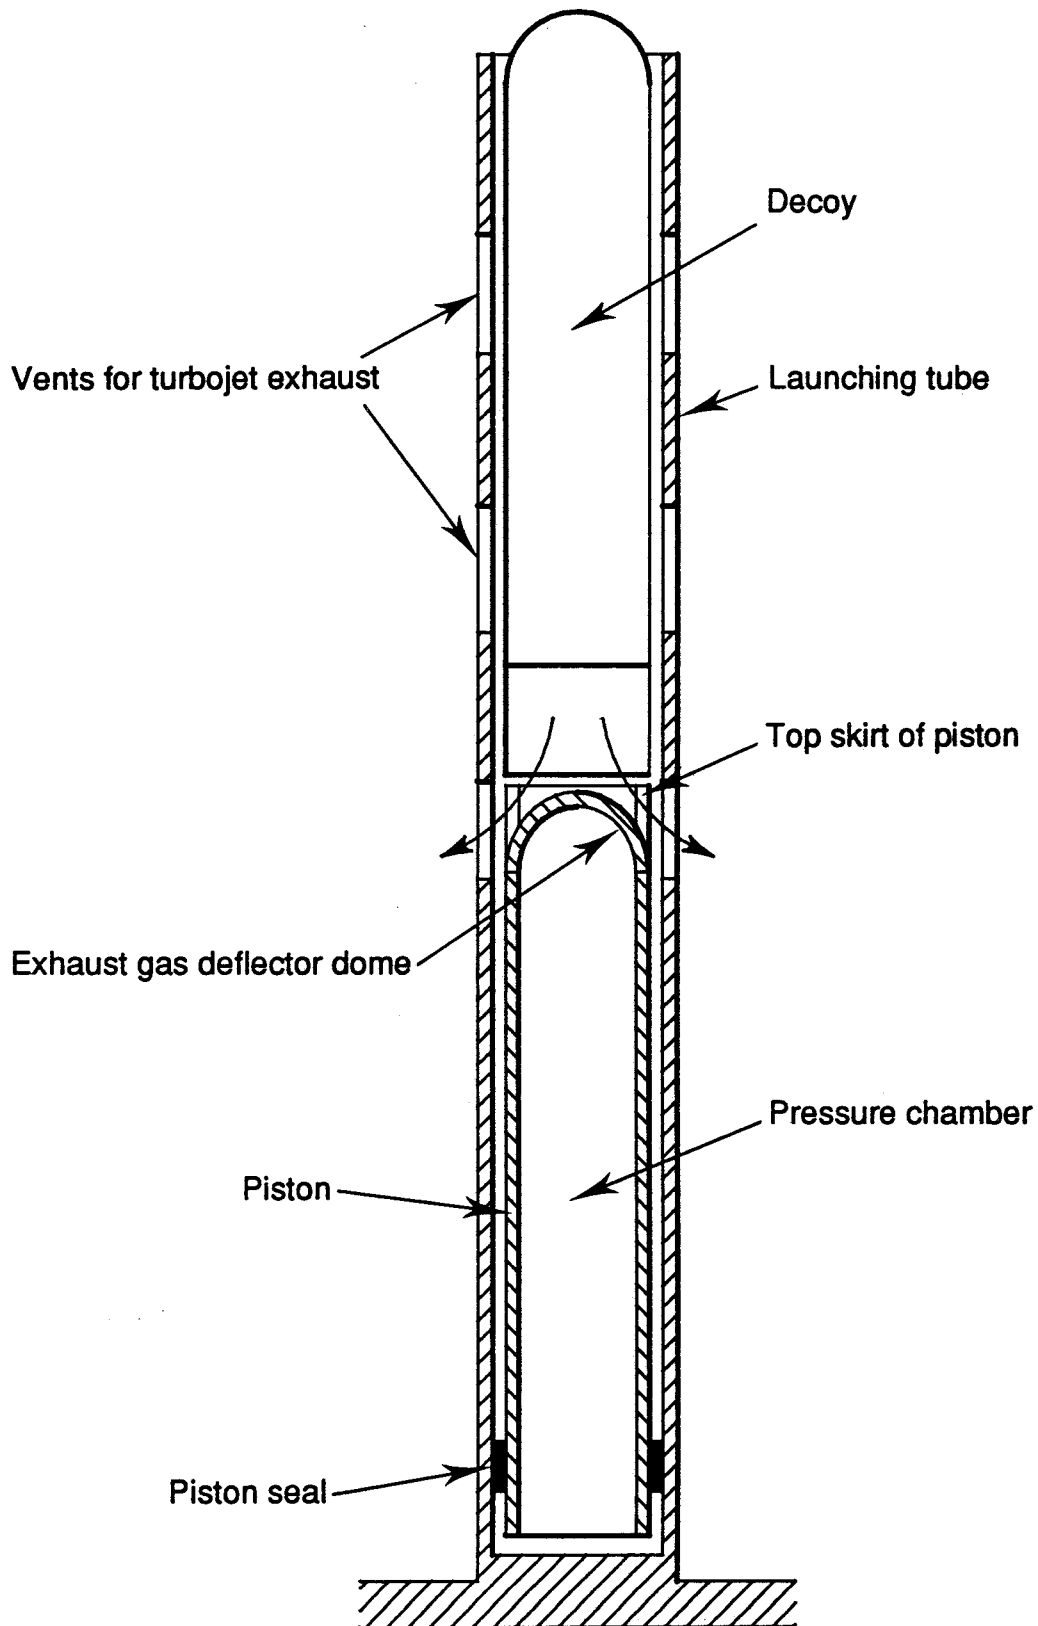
SCHEMATIC DETAILS OF LAUNCHER AND PISTON THAT MAY BE NECESSARY TO LAUNCH A DECOY WITH THE ENGINE MOUNTED ON THE BOTTOM
